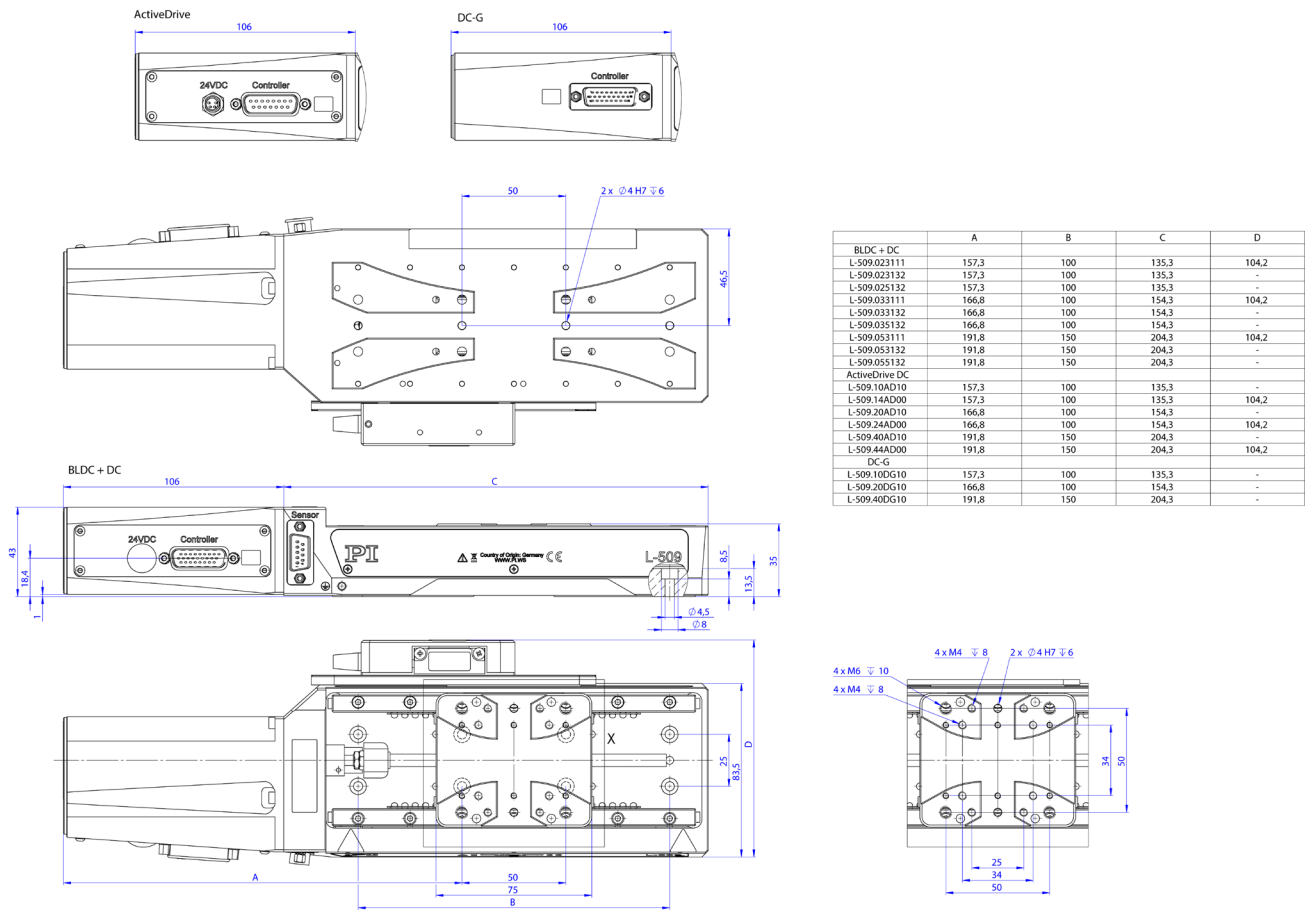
L-509 versions with BLDC, DC, DC gearhead, and ActiveDrive DC motors
